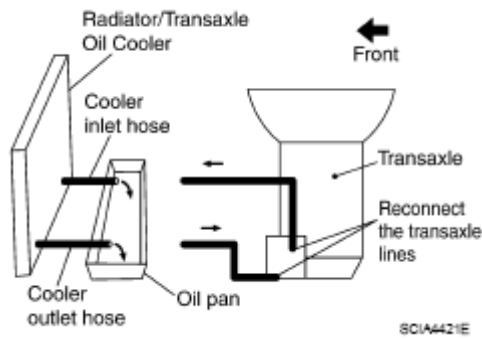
CVT Fluid Cooler Cleaning Procedure (1 Of 3)
